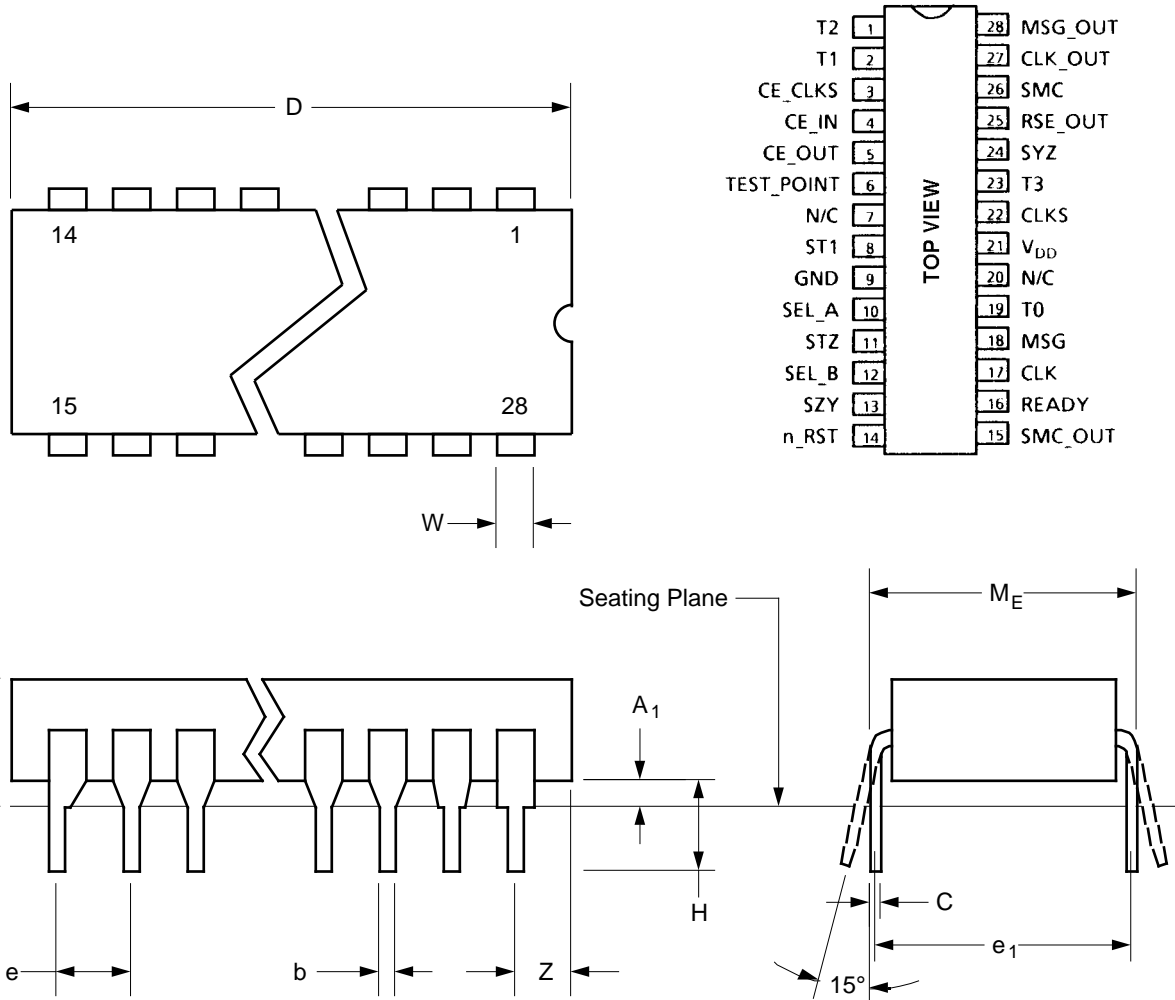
28-Lead Ceramic DIL (Solder Seal) - Package Style C
